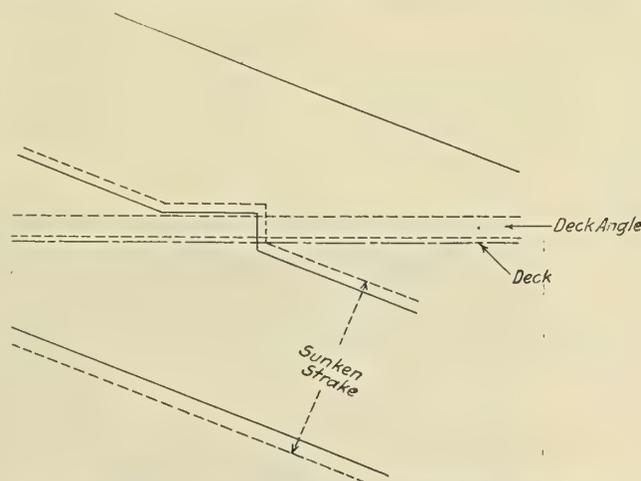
Method of Laying Out Strake so that Seam Laps Will Clear Deck Angle
